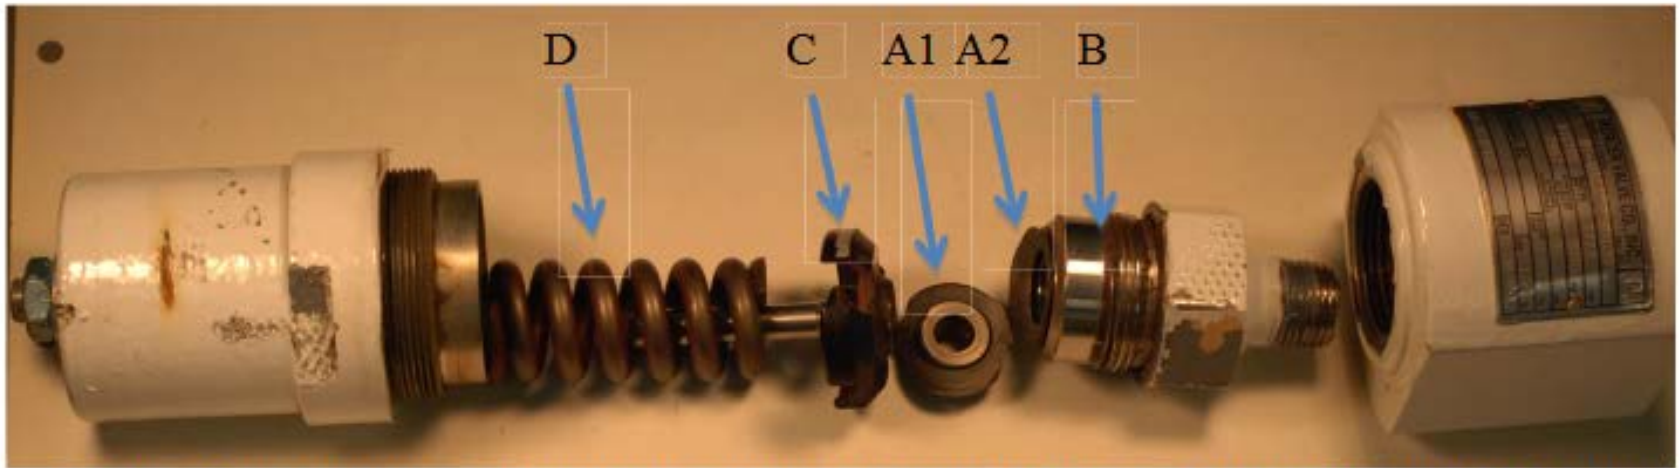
pressure relief valve components: failed nozzle subassembly (A1 and A2); inlet base (B); disk subassembly (C); set spring (D).
